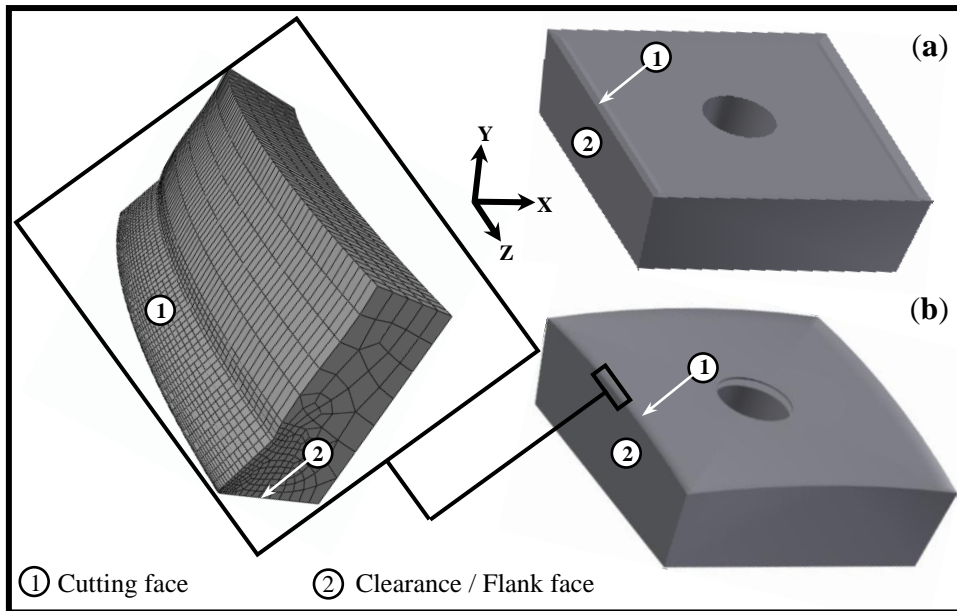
Geometrical representation of (a) Original industrial Insert (b) New design of insert
